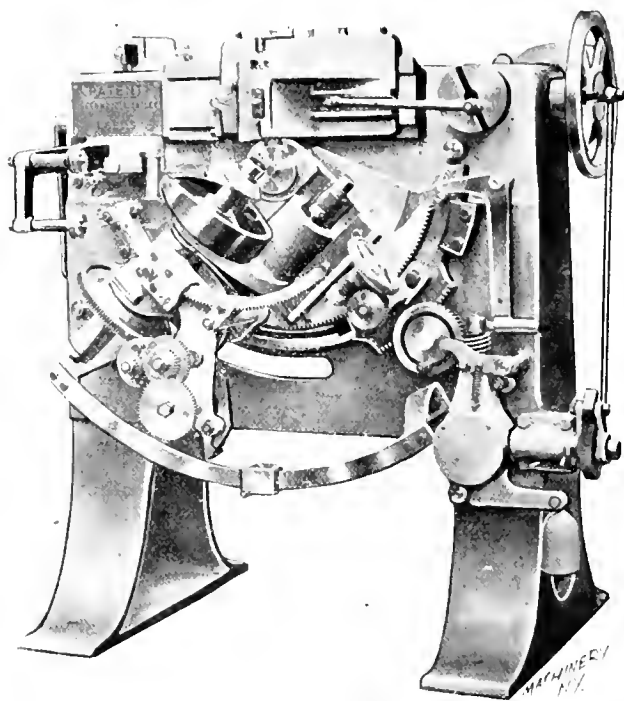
The Greenwood & Batley Templet Bevel Gear Shaping Machine.
